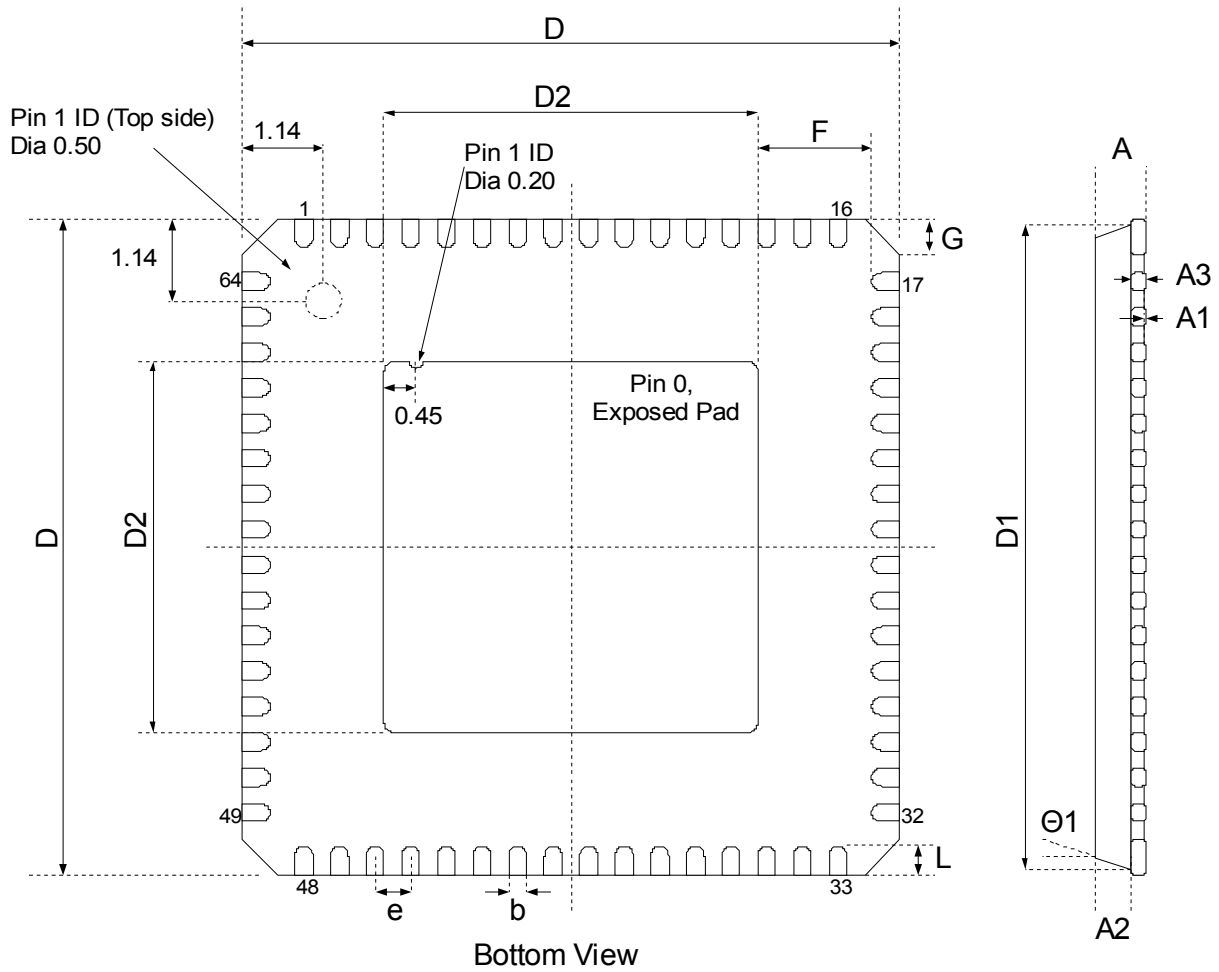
QFN 64 Package dimensions (millimeter unless otherwise noted)
